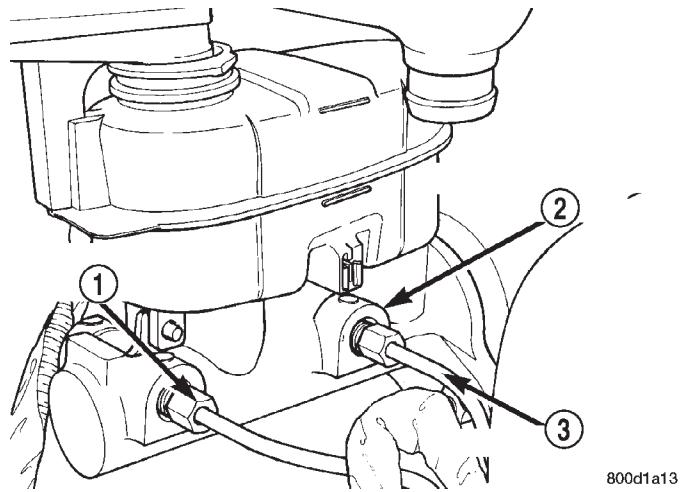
Primary/Secondary Brake Tubes At Master Cylinder
